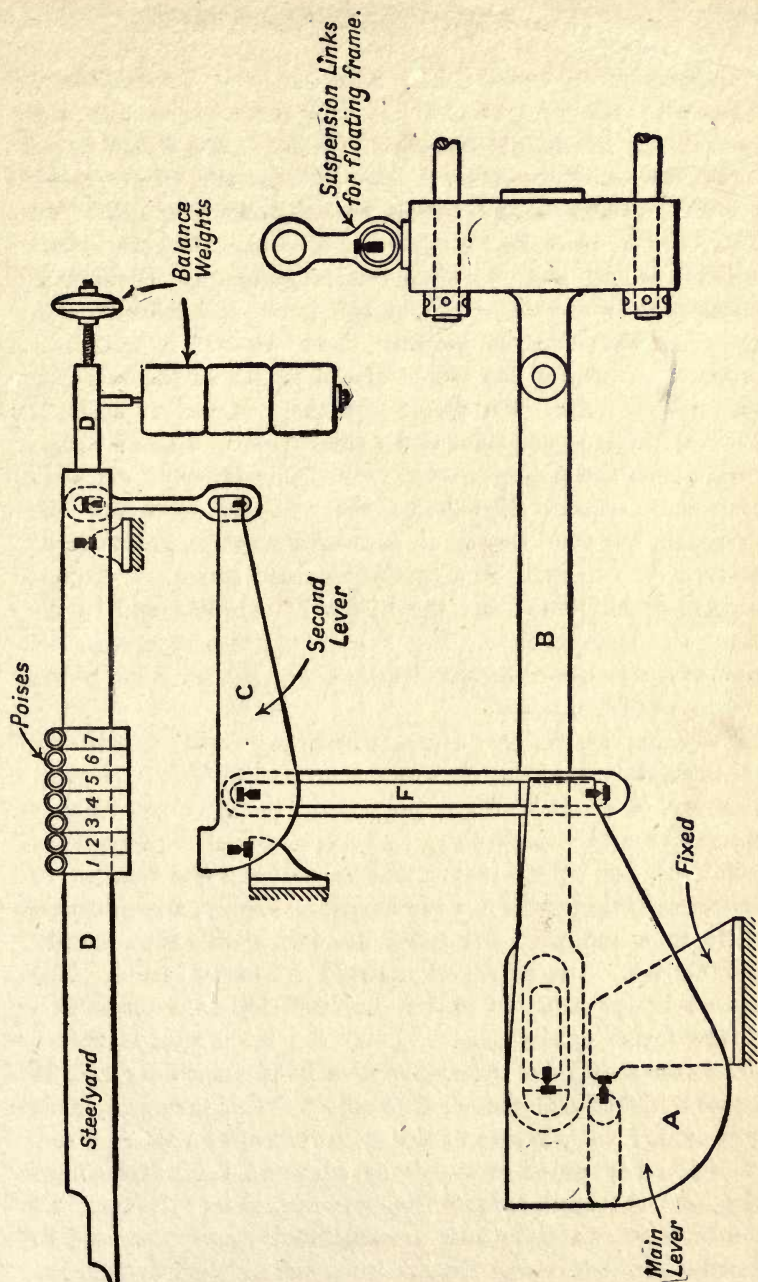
Details of Poise Gear and Levers on Birmingham 300-ton Machine.
